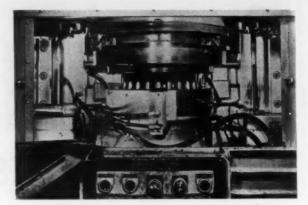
In cutting the gear teeth of the cylinder, form tools are rearranged to advance and retract at the beginning and end of each stroke for clearance. Feed is reduced at the end of the cycle for finishing and clean-up.
